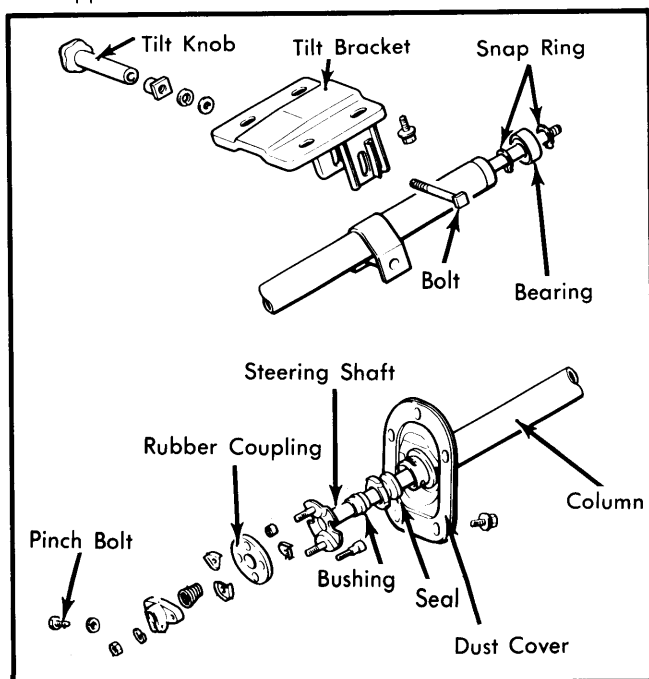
Exploded View of Steering Column Ram-50 and Arrow Pickup
